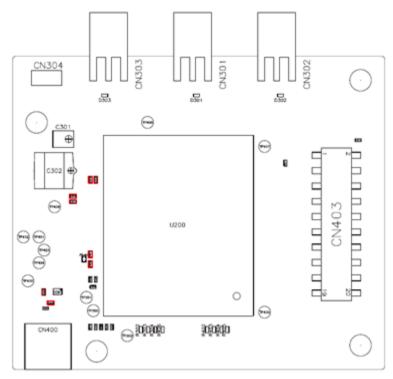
AirPrime SL8090 Socket-Up Board (Top View)
